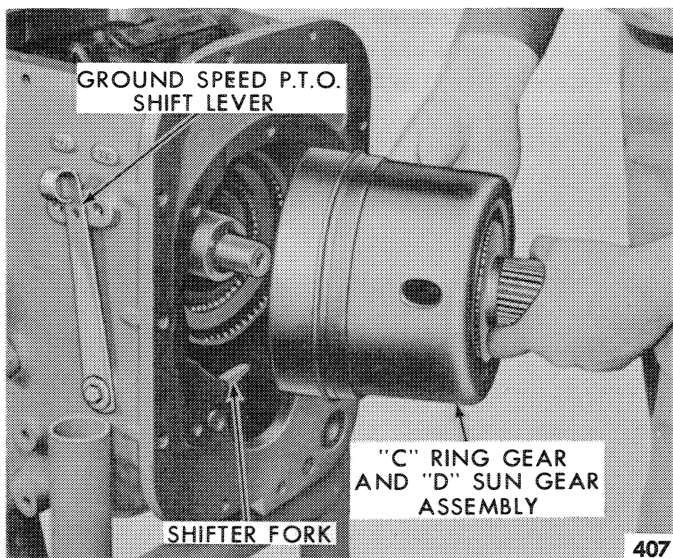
Removing the "C" Ring Gear and "D" Sun Gear
